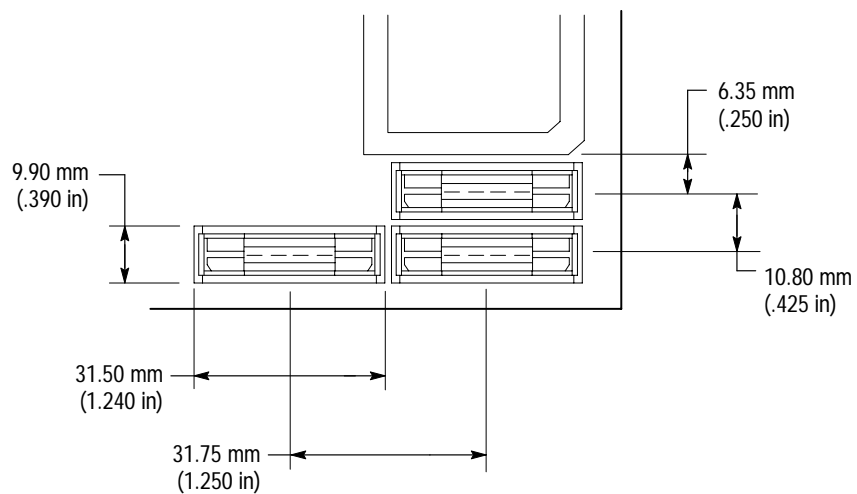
Dimensions and placement of a surface-mounted Mictor connector with latch housing
